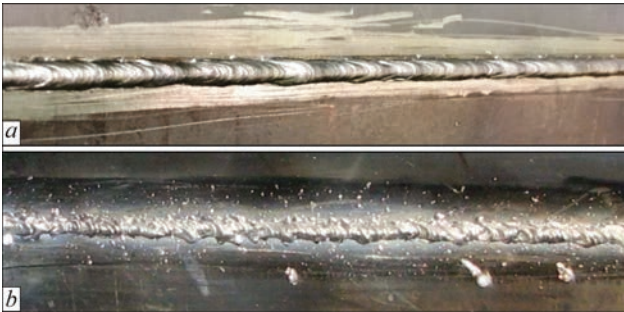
Appearance of the weld of a joint of 2219 alloy plates 40 mm thick from the side of electron beam entrance (a) and exit (b)
